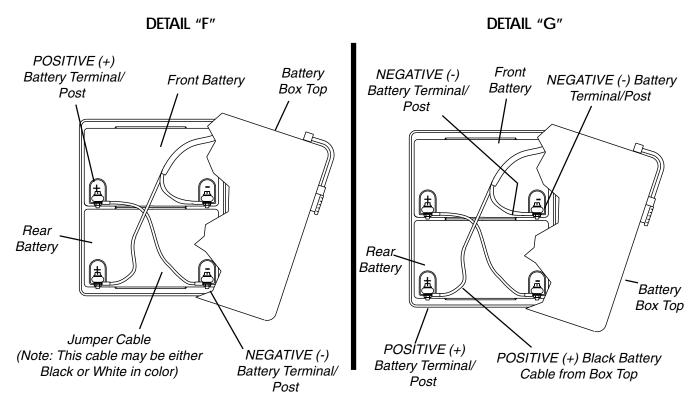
CONNECTING BATTERY CABLE(S) TO BATTERY(IES)
